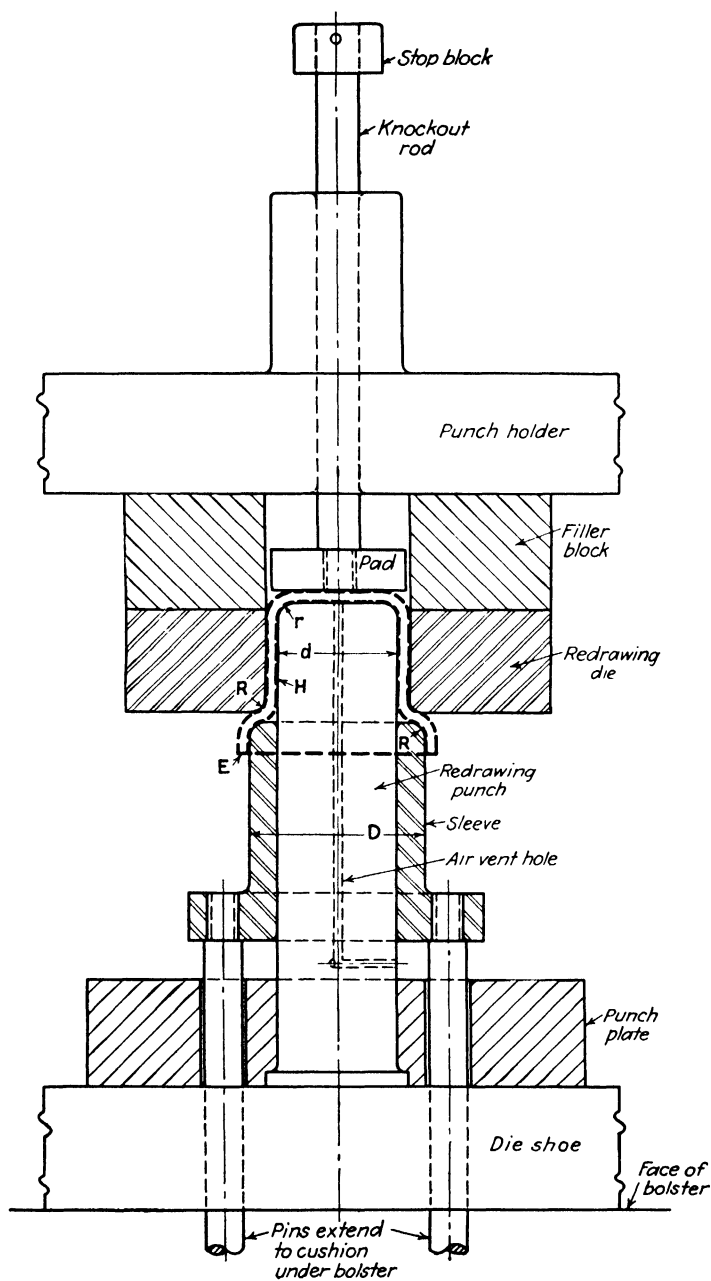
A typical redrawing die in which a sleeve is used for making a maximum reduction in diameter when redrawing cylindrical shells.
